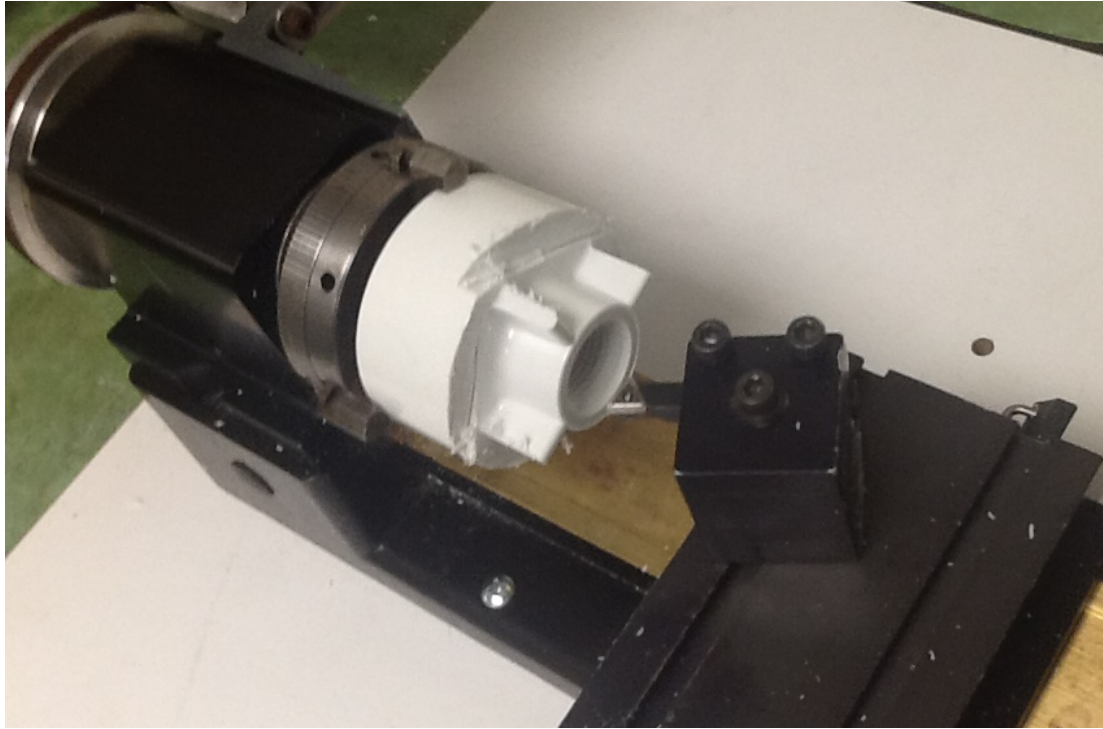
Fabrication of filter supports step 4. Lathe set up to remove the threads and expand the center diameter of the bushing frame.
